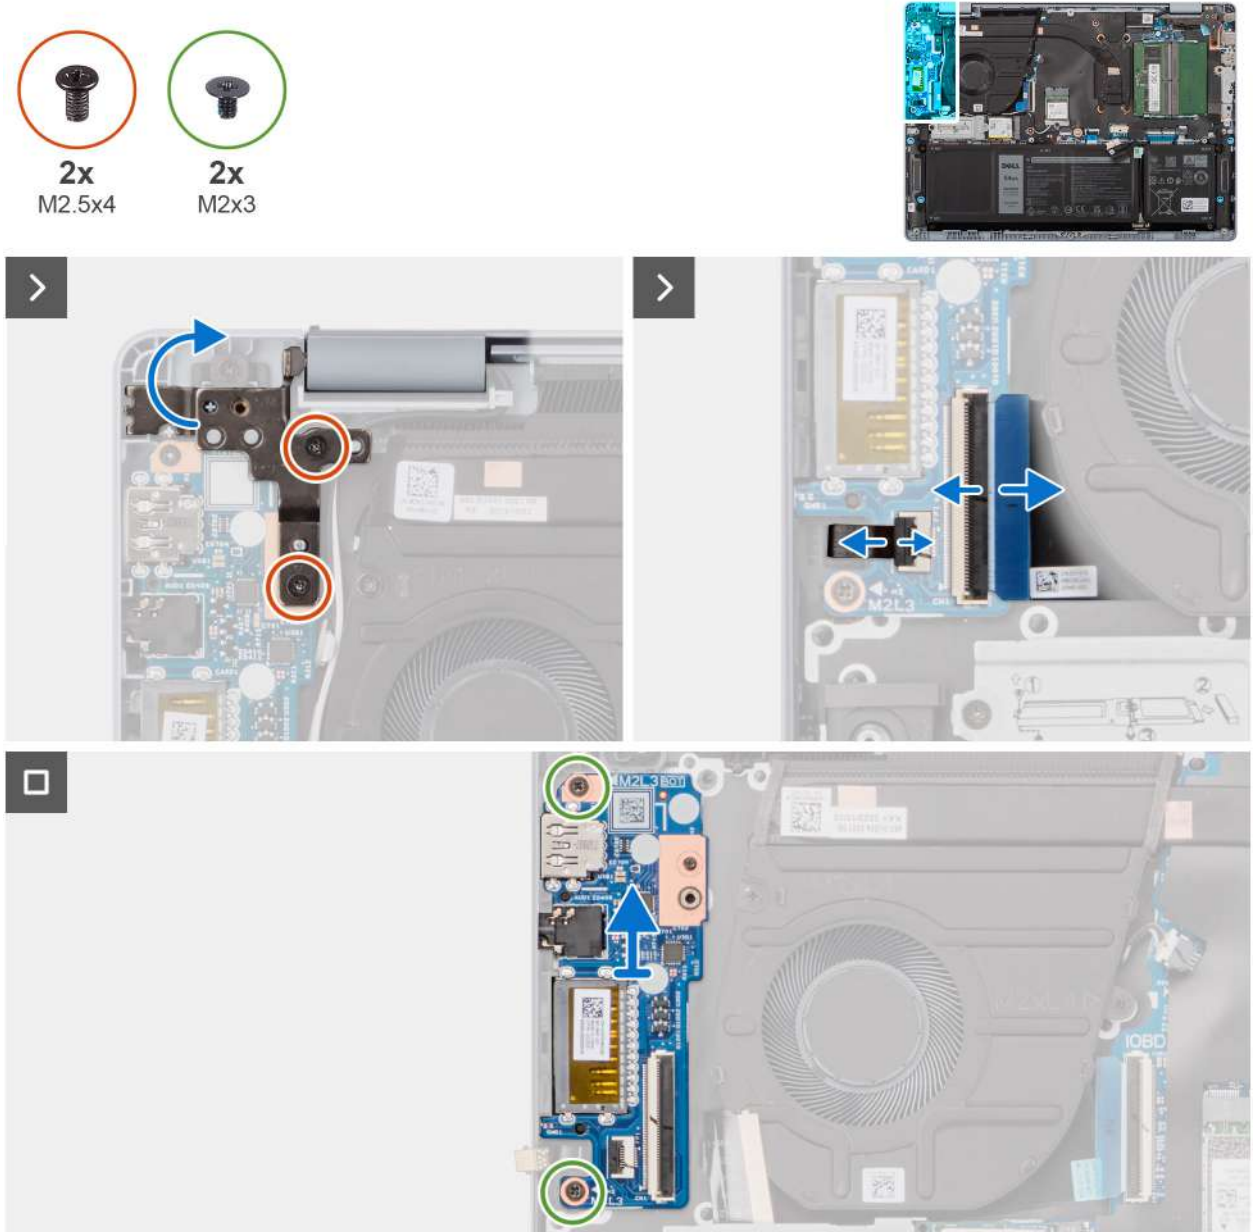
Removing the I/O board (for computers shipped with a plastic chassis)
